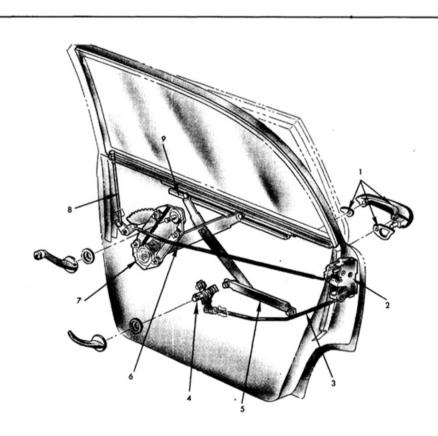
is typical of rear doors with the trim assembly and inner panel water deflector removed. This illustration identifies the component parts of the rear door assembly, their relationship and various attaching points.
